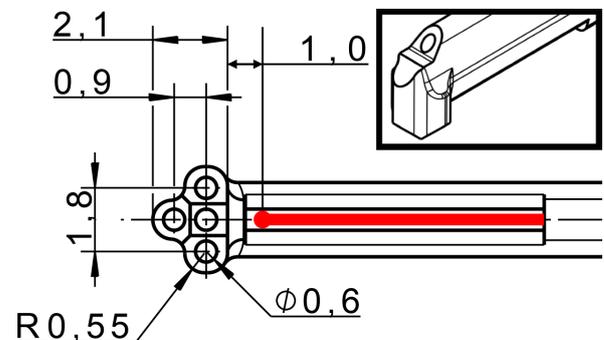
5HP head dimensions, TC in red, back pressure hole behind head (top right)
